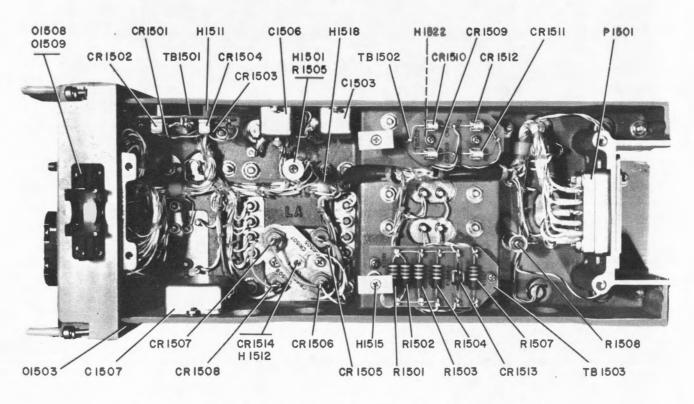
Power Supply PP-2702/URC-9, Bottom View
